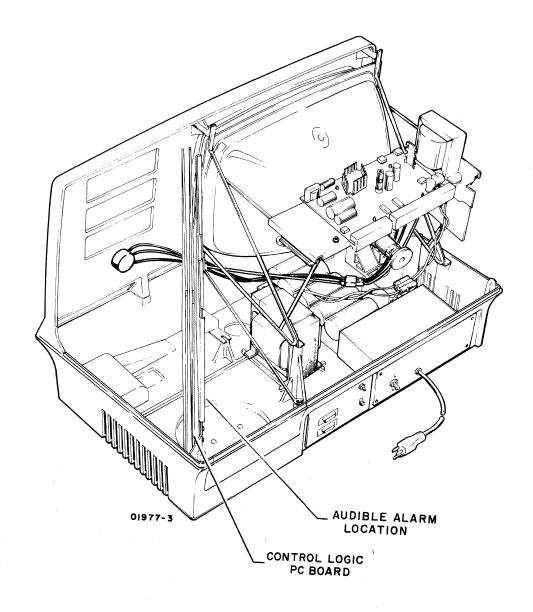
Location of Audible Alarm and Control Logic PC Board
